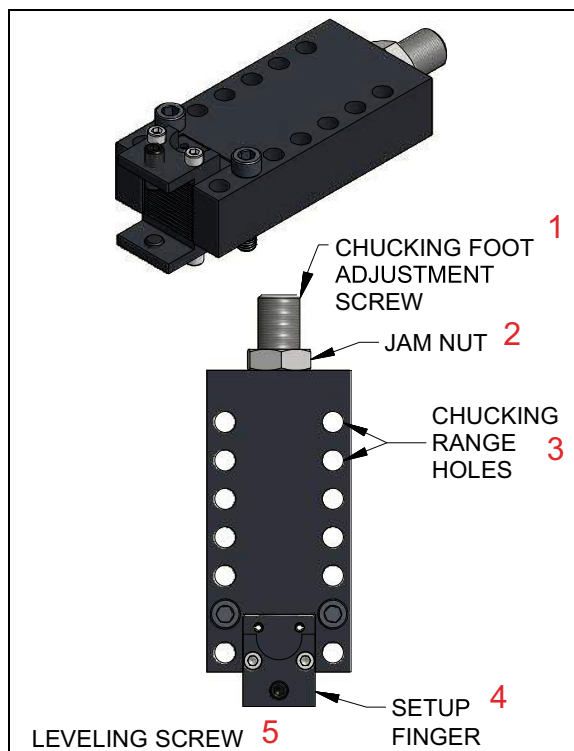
FF1200 CHUCKING FOOT COMPONENTS
